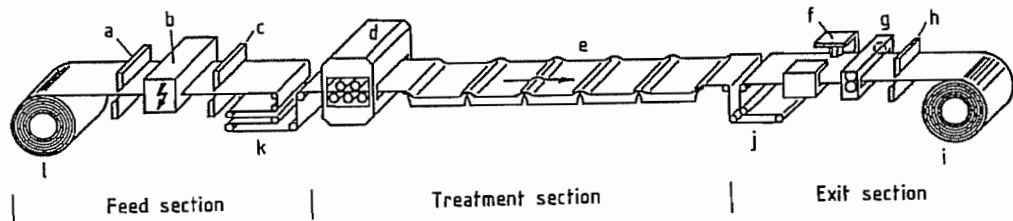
Continuous pickling plant: a) Cropping shears 1 (head); b) Welding/planning machine; c) Cropping shears 2 (foot); d) Stretch-bend-leveling device; e) Pickling/washing; f) Stamping device; g) Trimming shears; h) Cropping shears; i) Take-up reel; j) Exit looper; k) Entry looper; l) Pay-off reel.
